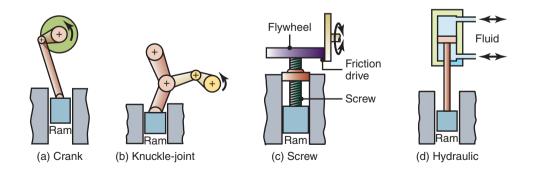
Schematic illustration of the principles of various forging machines. (a) Mechanical press with an eccentric drive; the eccentric shaft can be replaced by a crankshaft to give up-and-down motion to the ram. (b) Knuckle-joint press. (c) Screw press. (d) Hydraulic press.
